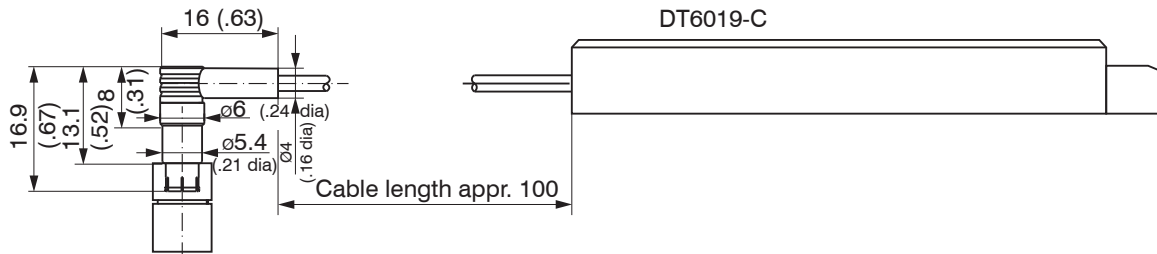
Dimensional drawing sensor cable with angled connector for the sensors CS02 and CS05
